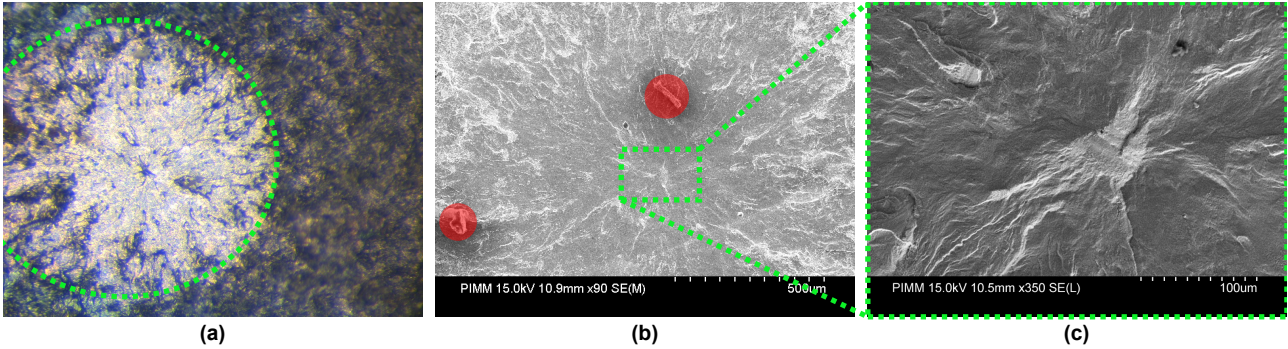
Post-fracture microscopy of the C70 steel fatigue specimen of test 14. The red zones in (b) correspond to foreign particles and not of the fracture surface.
